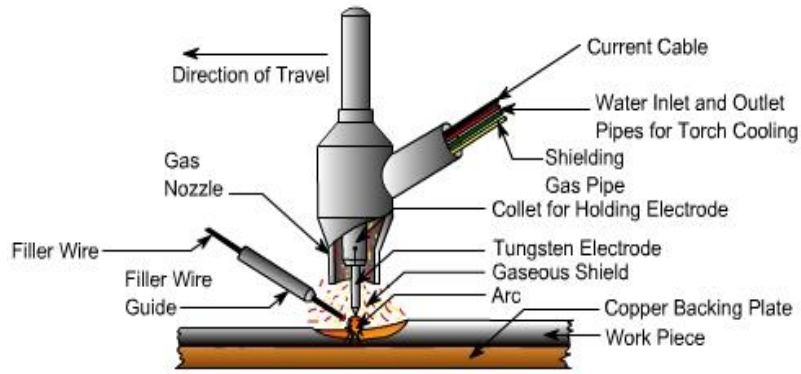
Schematic diagram of TIG welding operation [www. Nptel.ac.in]
